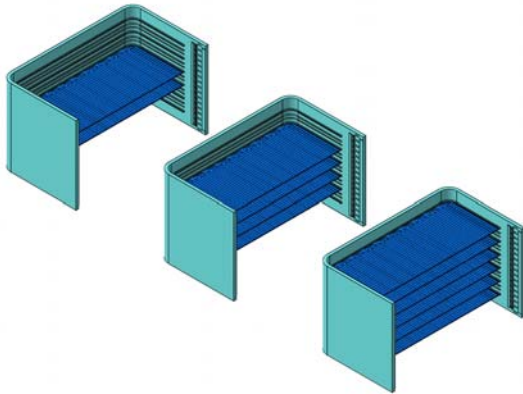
Fabrication sequence for the welding of the stiffening plate into the FW shell: insertion of the plates in correct position and tack weld starting from the medium plate. A full mechanised TIG welding will follow this step. (CATIA V.5 drawings).
